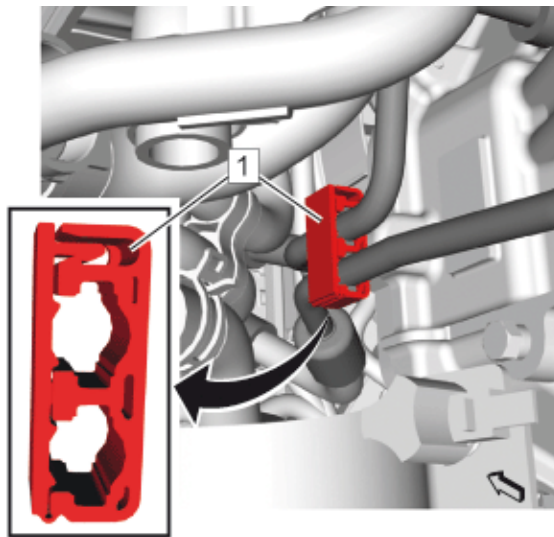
Transmission Fluid Cooler Inlet And Outlet Pipe Clip
